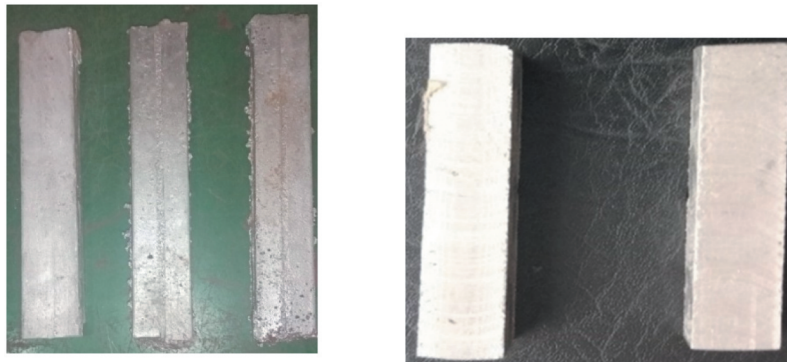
Aluminum samples(a) before machining, (b) after machining.
